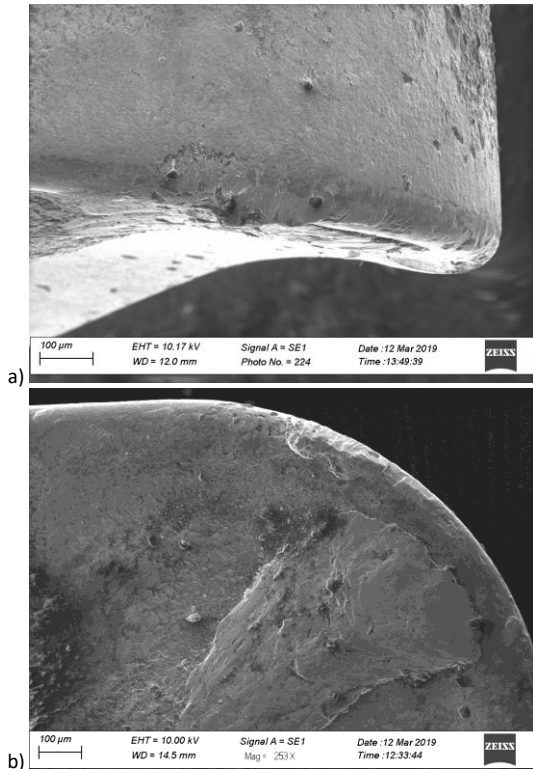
The microscopic view of flank (a) and rake face (b) wear for CCMT 09T308-UM 2025 cutting insert
